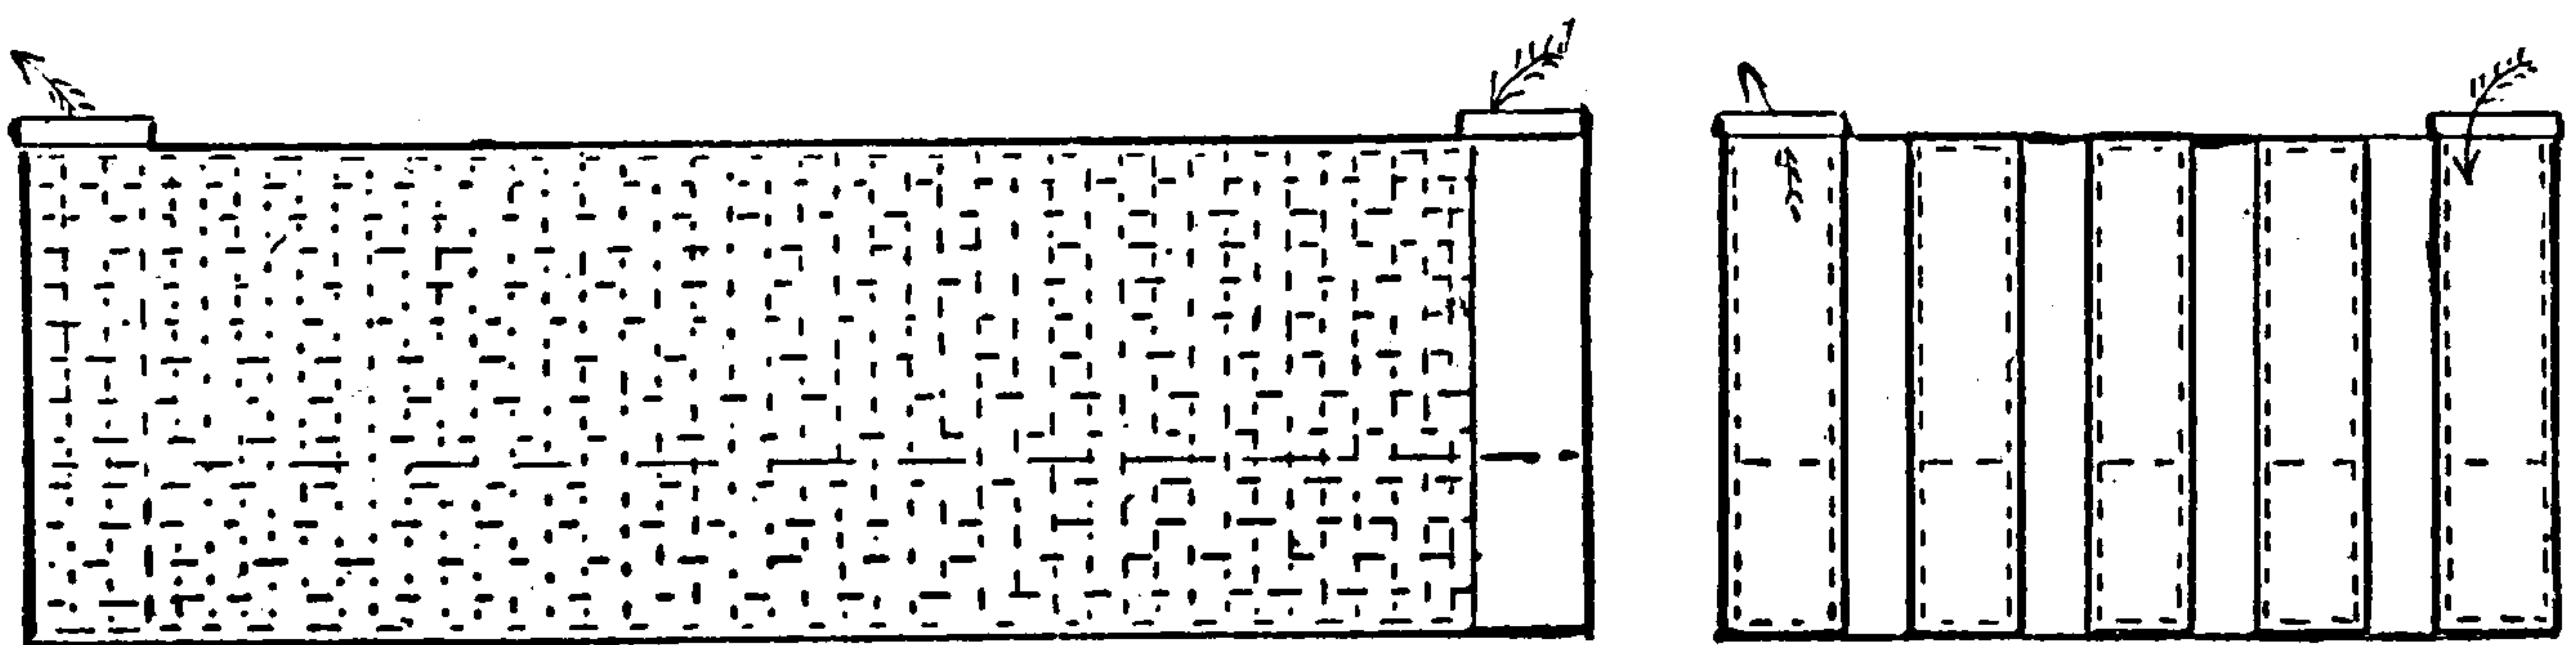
SECTIONS OF VENTILATING CARBURETTER.
